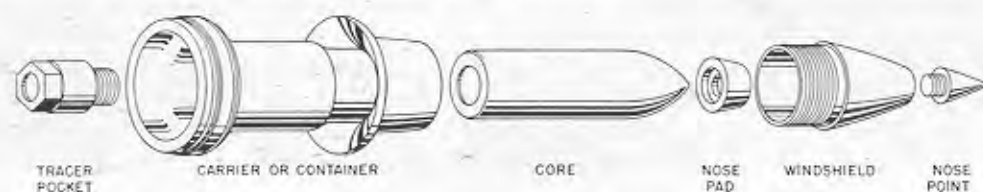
Exploded view of skirted projectile containing a tungsten carbide core to be fired from a tapered-bore gun.
